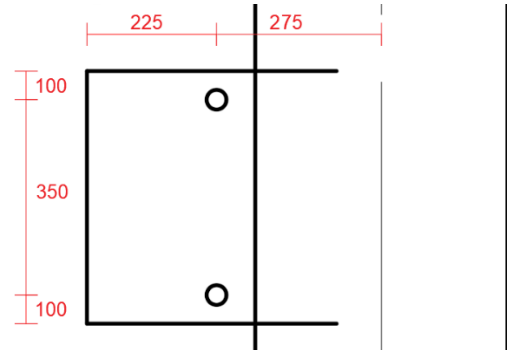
Bottom view of the clamping plate with dimensions (in mm)
